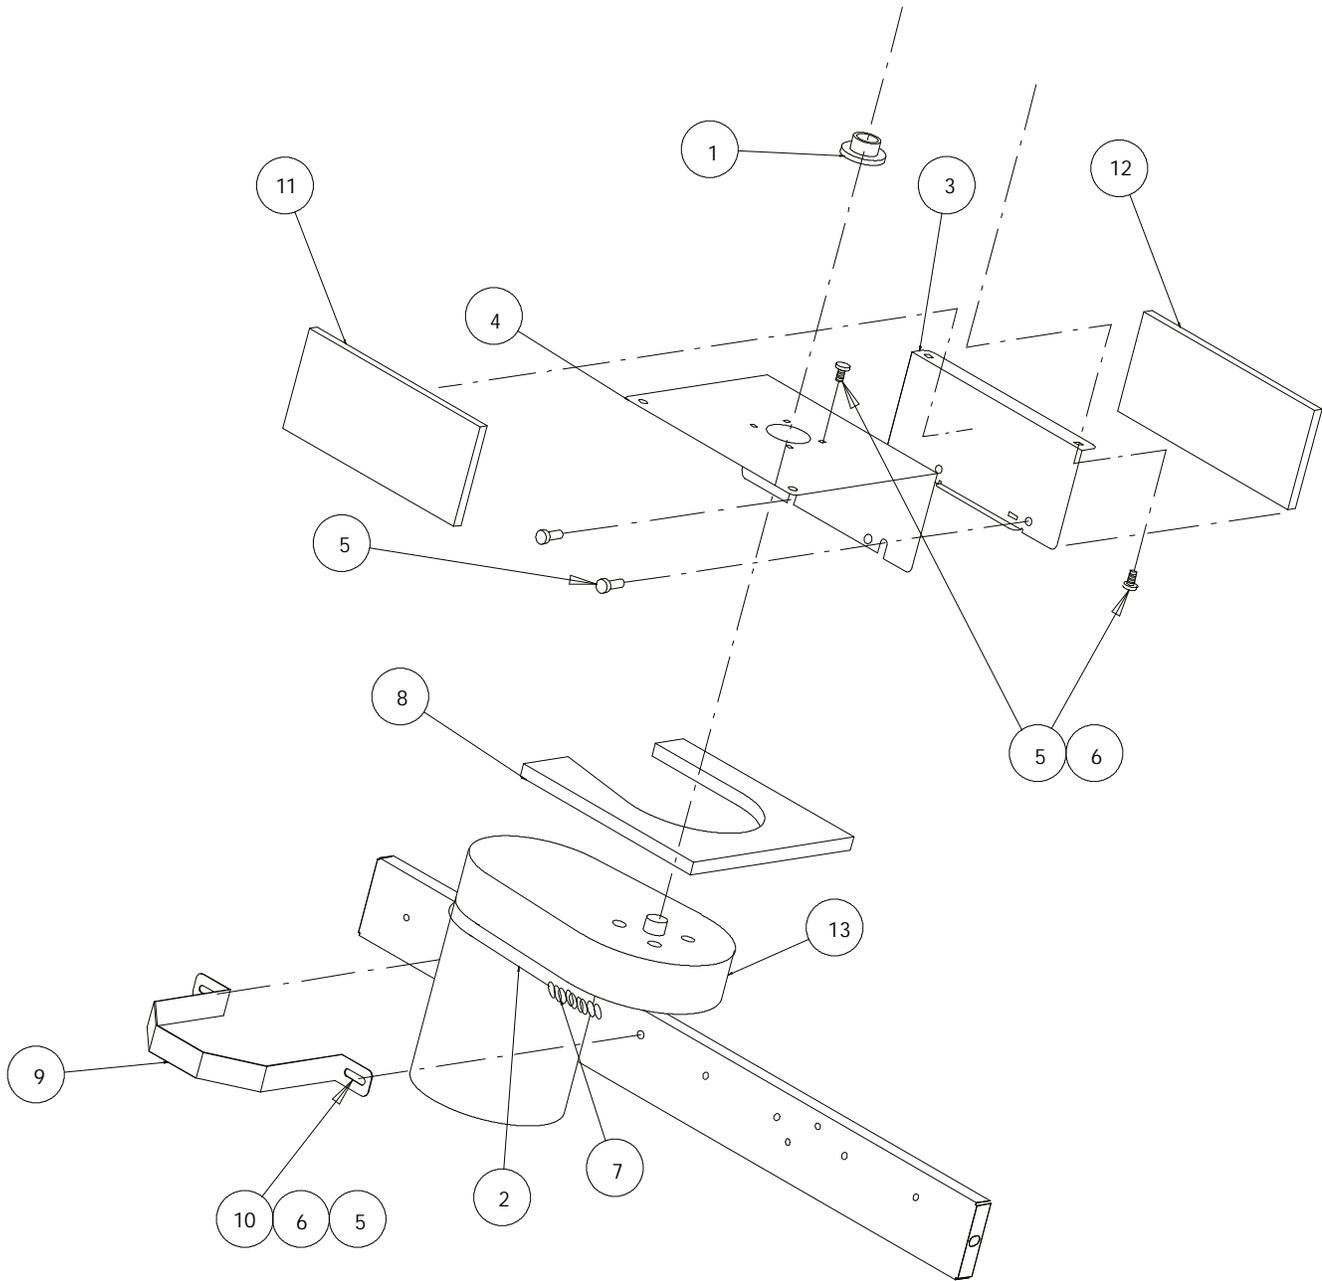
MOTOR ASSEMBLY DETAIL - EXPLODED VIEW AND PARTS LIST
